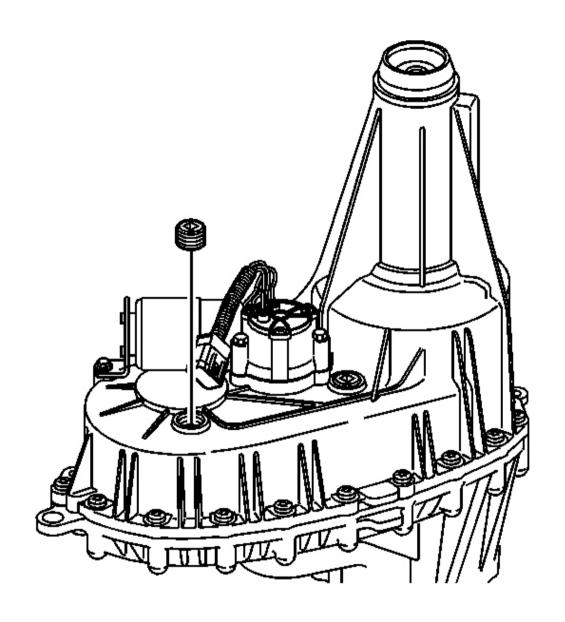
View Of Drain & Fill Plug Courtesy of GENERAL MOTORS CORP.
